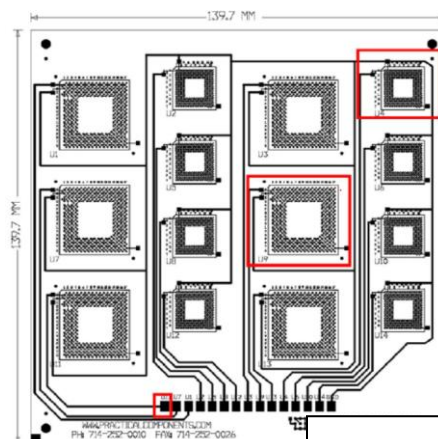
BGA Manufacturing DoE Test Board. Boxed locations (U4, U9, PCB pad for U11) are thermocouple locations.
